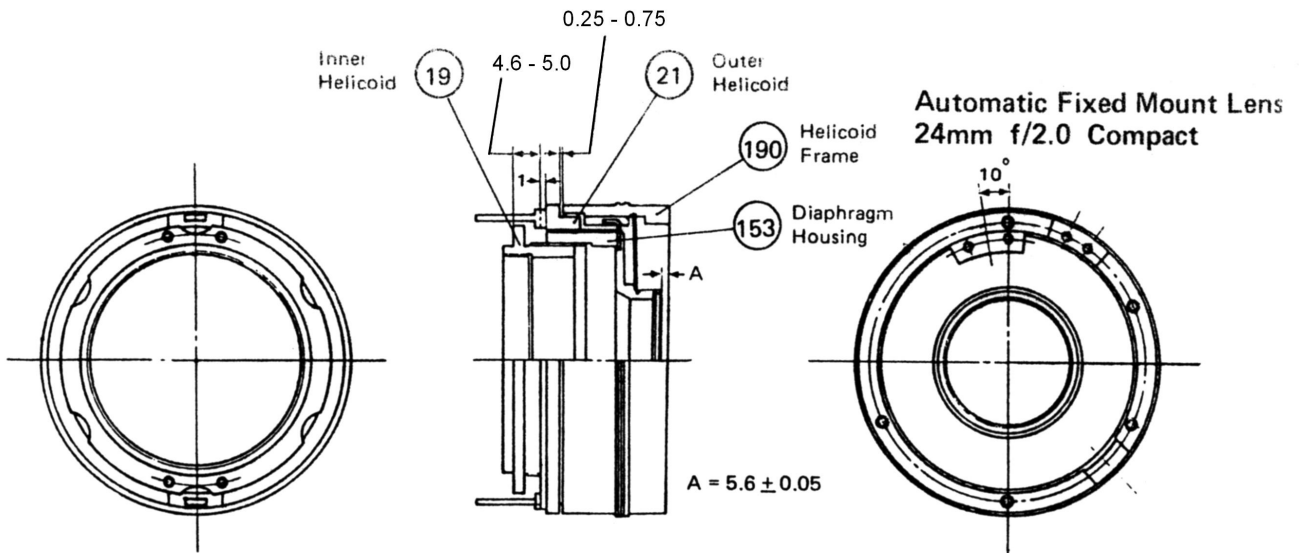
Helicoid Assembly Critical Dimensions, Konica Mount
